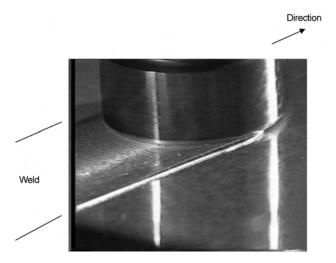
Friction stir welding of aluminum alloy. Courtesy of ESAB Welding Equipment AB
